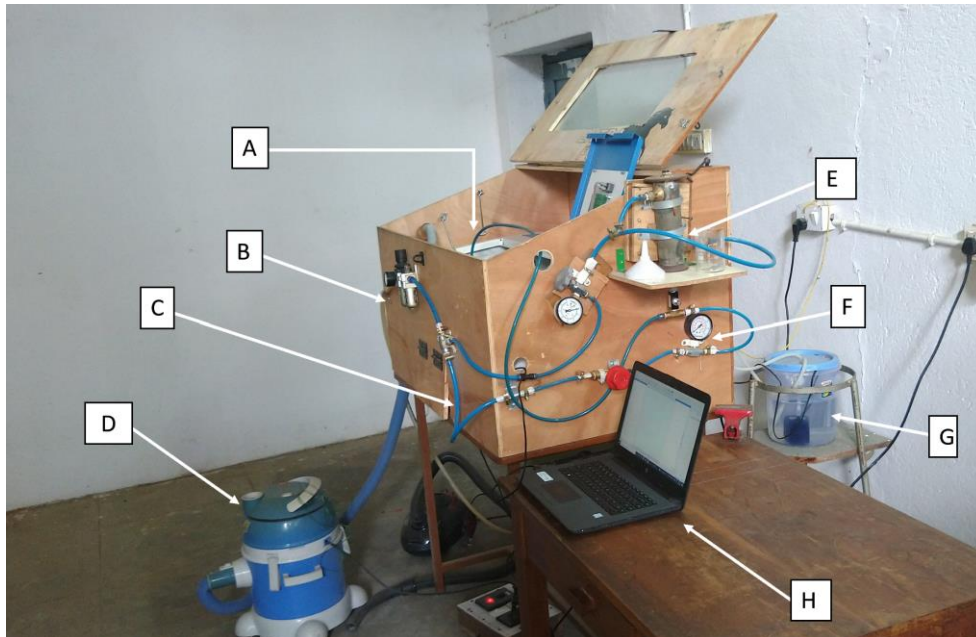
Experimental setup of CO₂ laser assisted abrasive jet machining
